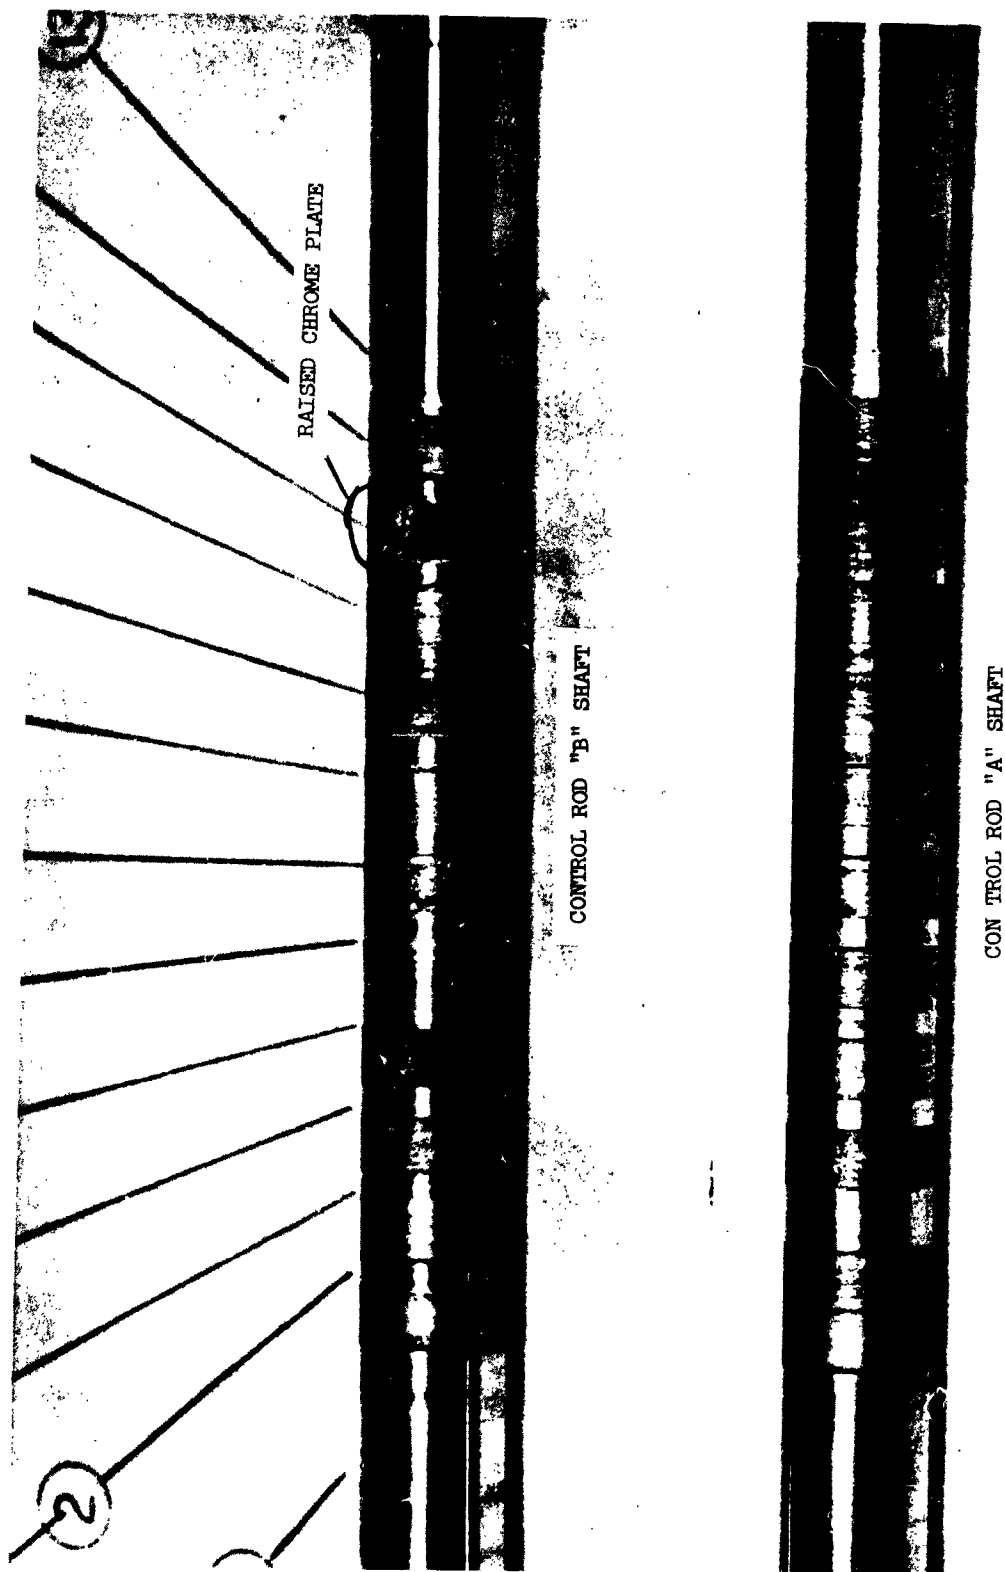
Quadrant IV - SM-1 Control Rods "A" & "B" Shafts
